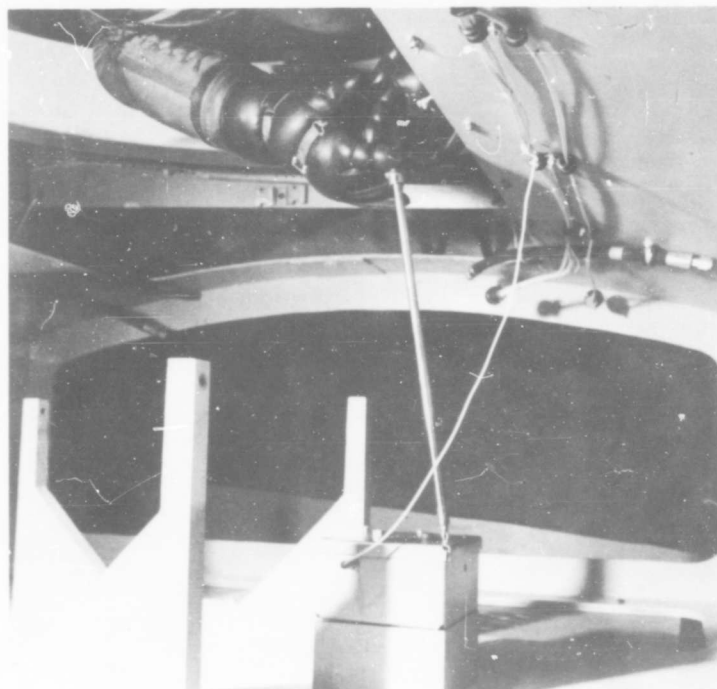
USE OF LONG SCREW DRIVER FOR SWITCH REPLACEMENT
